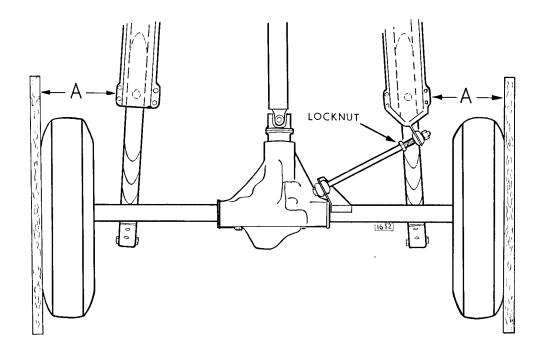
Panhard rod adjustment. Dimension "A" must be the same at both sides.
